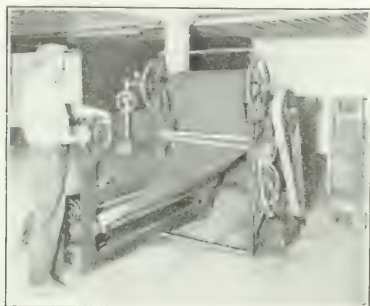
1-Hp Motor Driving Cloth-Folding Machine.
